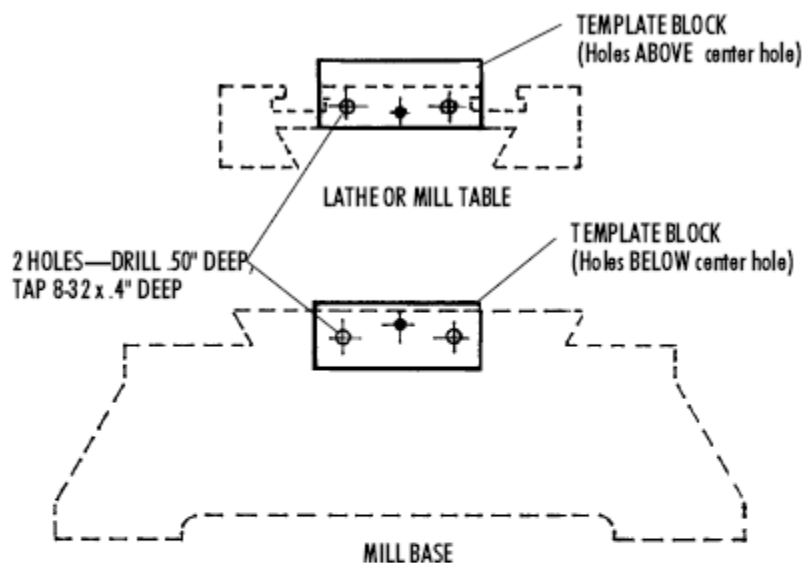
The rectangular block is used for the lathe and mill tables as well as the mill base. On the tables, the two new drilled holes are ABOVE the existing center hole, while on the mill base, the two new holes go BELOW the center hole as shown in the drawings above. Note that on mills made after 2002 these holes may already be in place.
